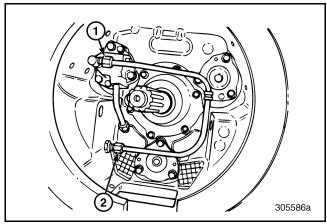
Tighten Upper and Lower Discharge Tube Fittings
